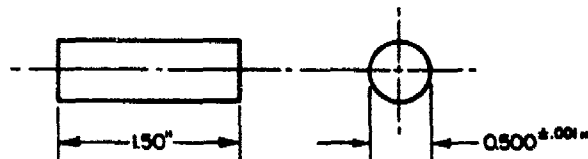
Compression specimen for Inconel 718 and Inconel 625 bars. Drawing 3Co.
